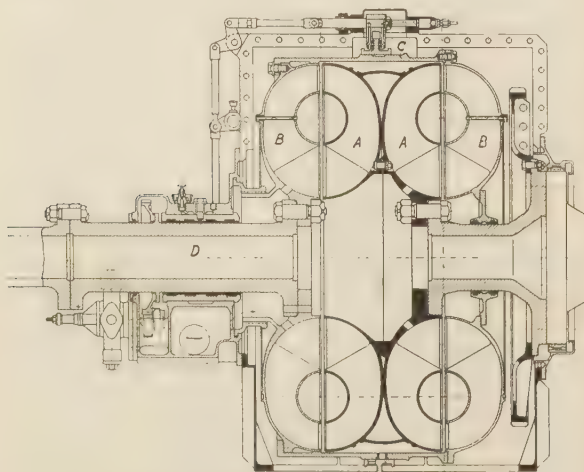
A DOUBLE HYDRAULIC COUPLING
